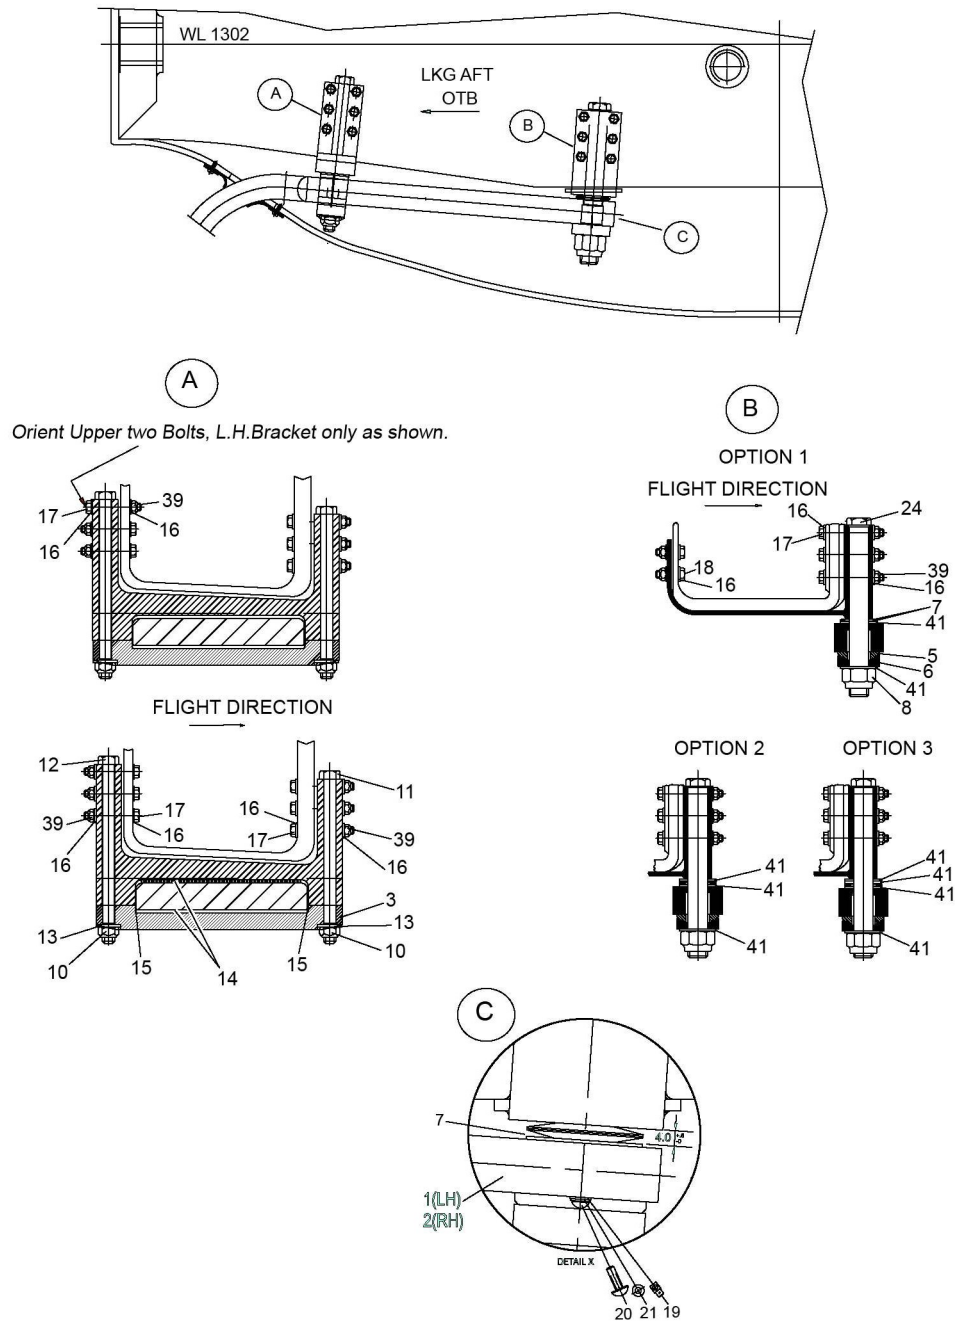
, Sheet 2 - Aluminum Main Landing Gear
